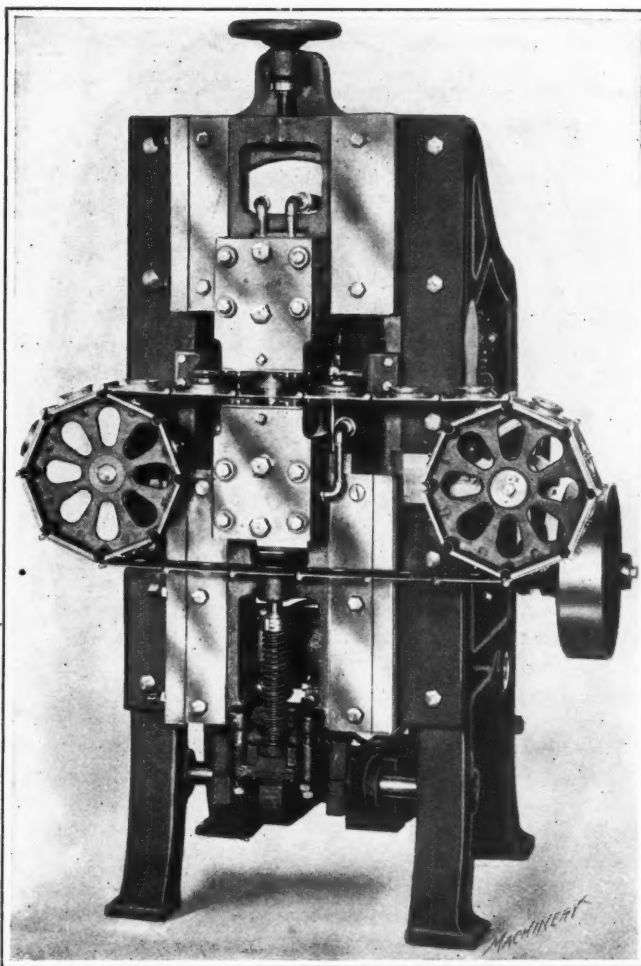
Special Electric Seam Welding Machine built by the Universal Electric Welder Co.
